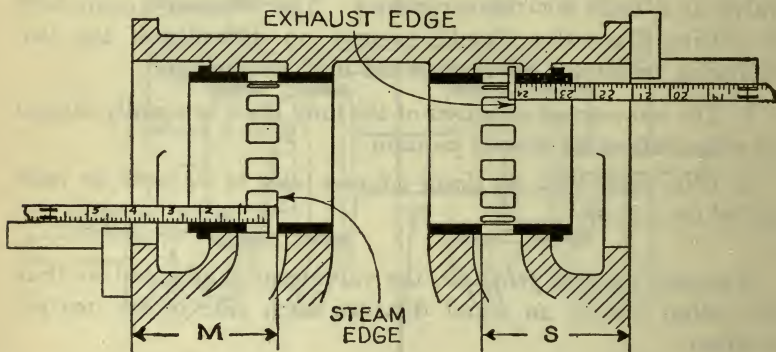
Method of measuring the location of the ports. A strip of metal is soldered on the brass end of the scale as shown, being placed at the side to measure the steam edge M, and over the end, for the exhaust edge S.
